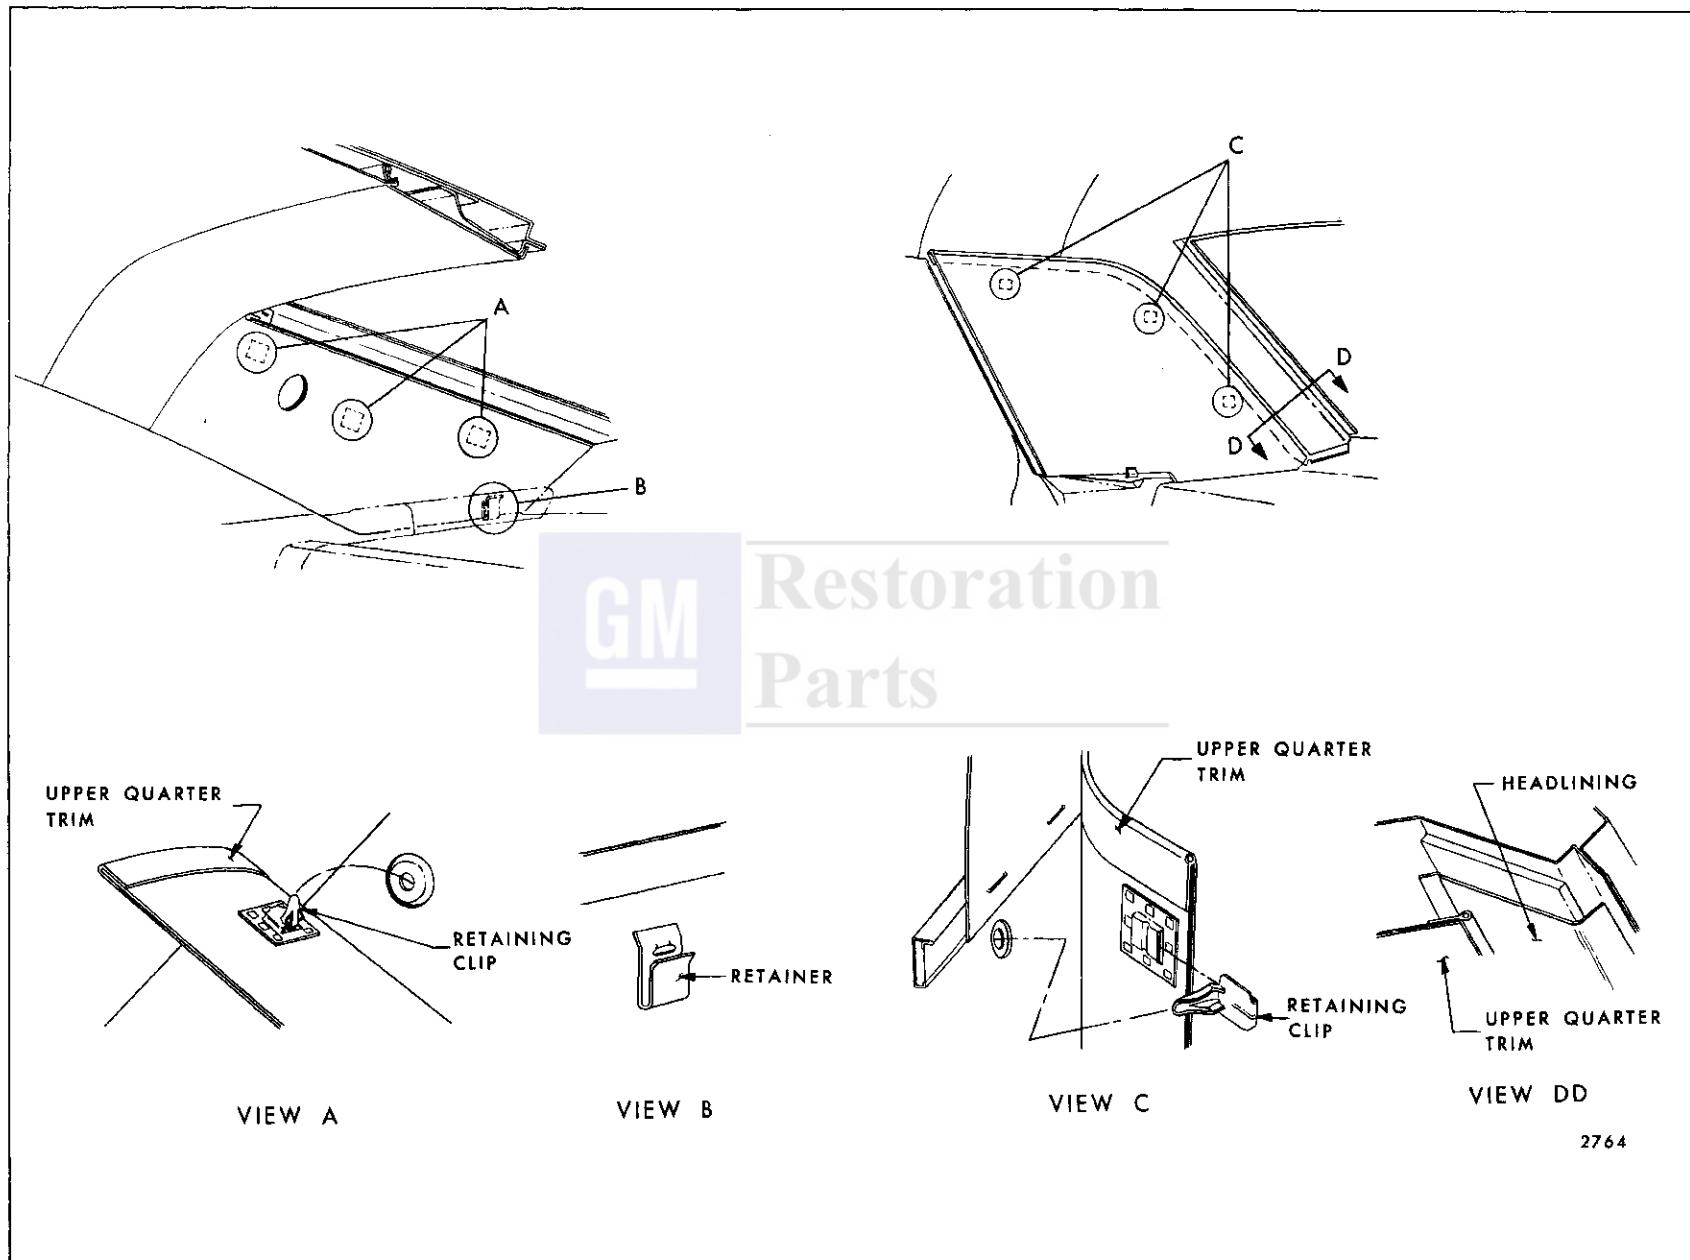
Typical Upper Quarter Trim Finishing Panels
